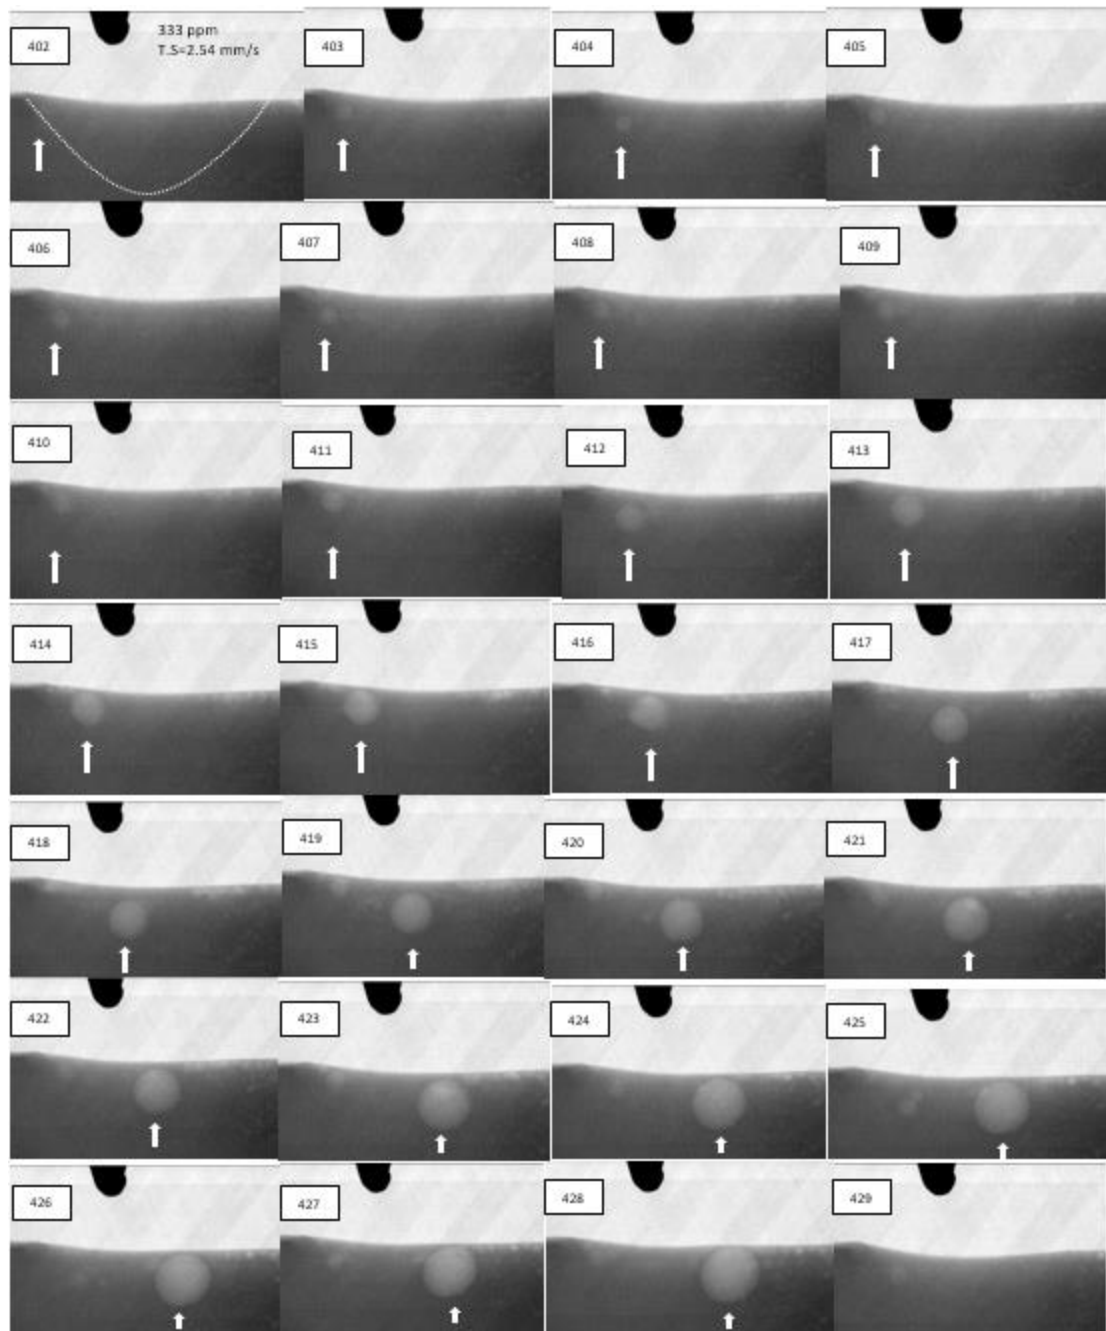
Alloy 6061 welded using 333 ppm of shielding gas hydrogen at 2.54 mm/s.
